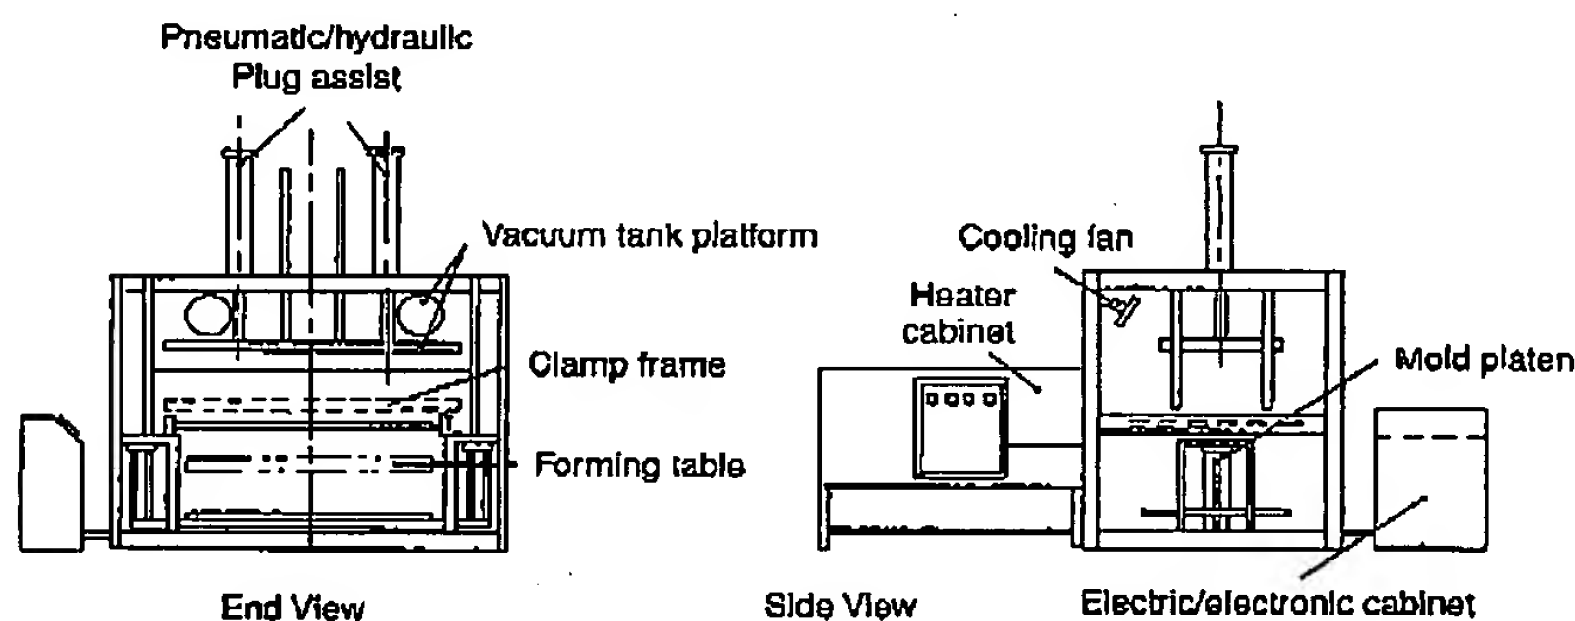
Schematic of heavy-gauge shuttle thermoforming machine (Drypol/Zimco, no longer in business) (14). Used with permission of Hanser Publications.
